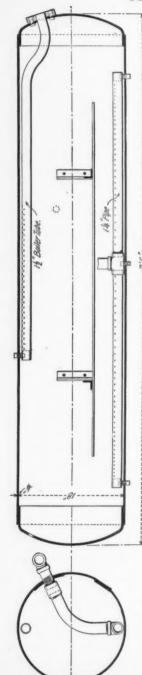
HEATER FOR COMPRESSED AIR MOTOR CAR-APRIL, 1900.
